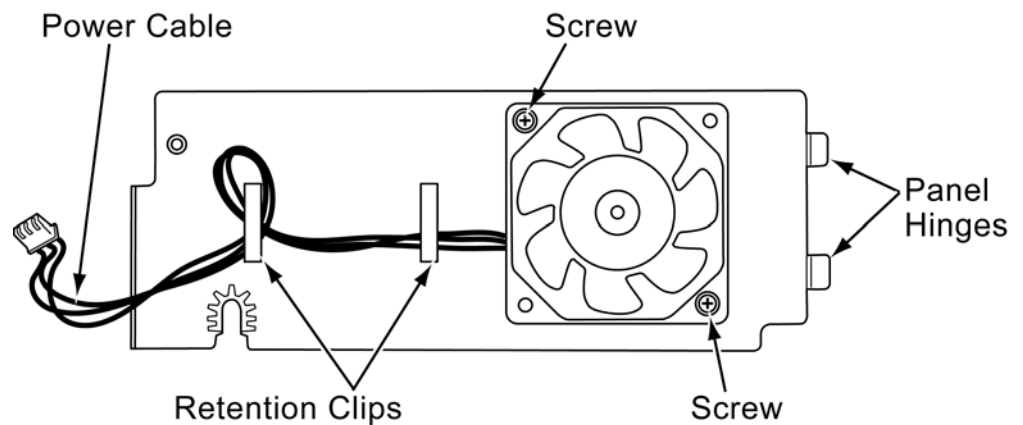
Chassis Access Panel Removed (CHS2U-AU Chassis)
